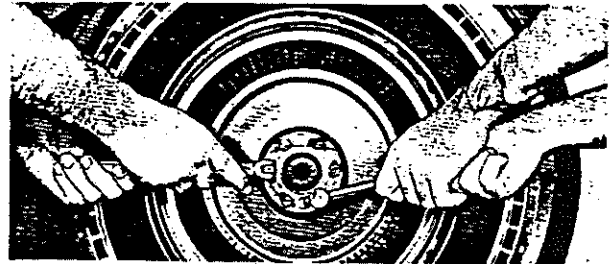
Removing First Stage Turbine Wheel Plate Bolts
